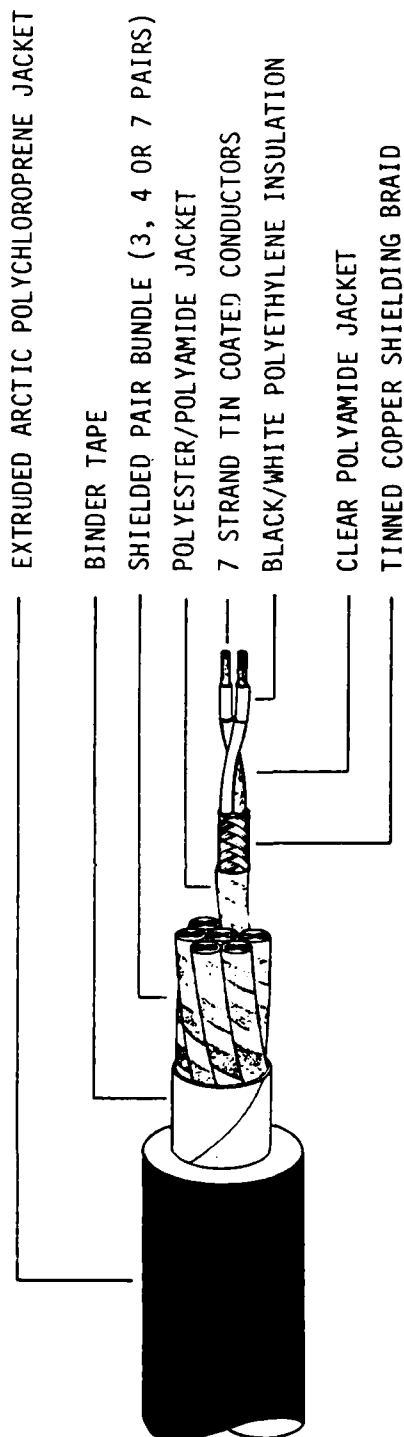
MIL-C-915 2SWF TYPE CABLE CONSTRUCTION
